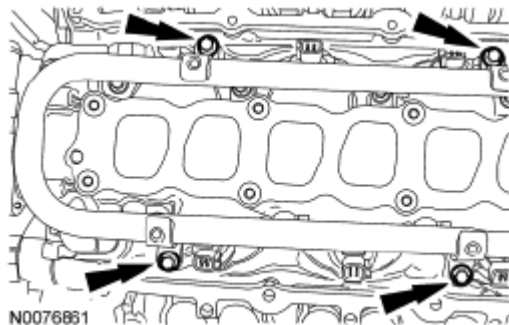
Locating Fuel Rail & Injectors Assembly Bolts
